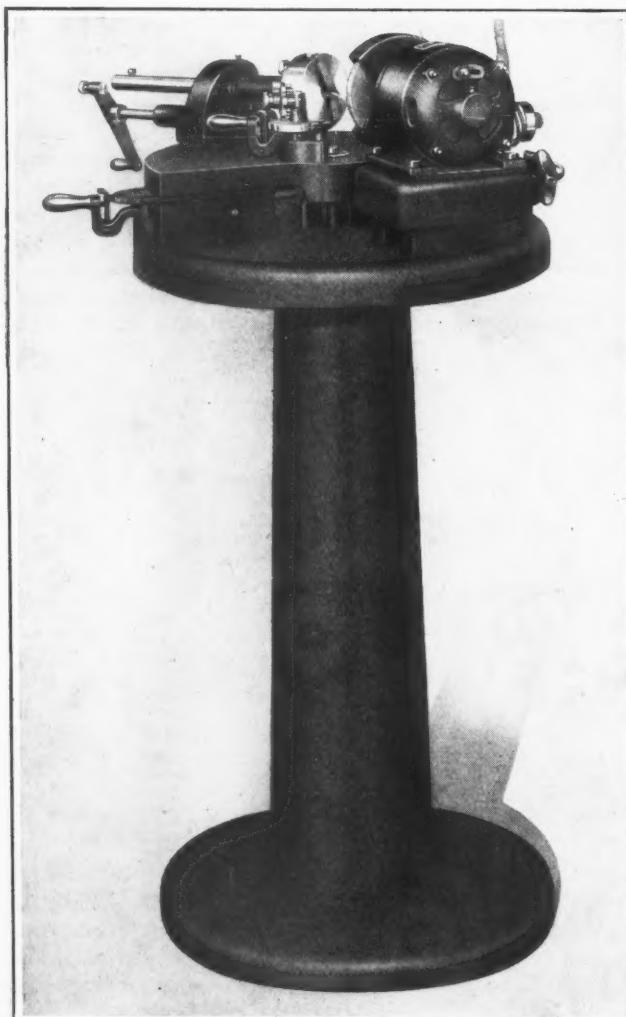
Rear View of Surface Grinder showing Crank and Connecting-rod for oscillating the Wheel-head
